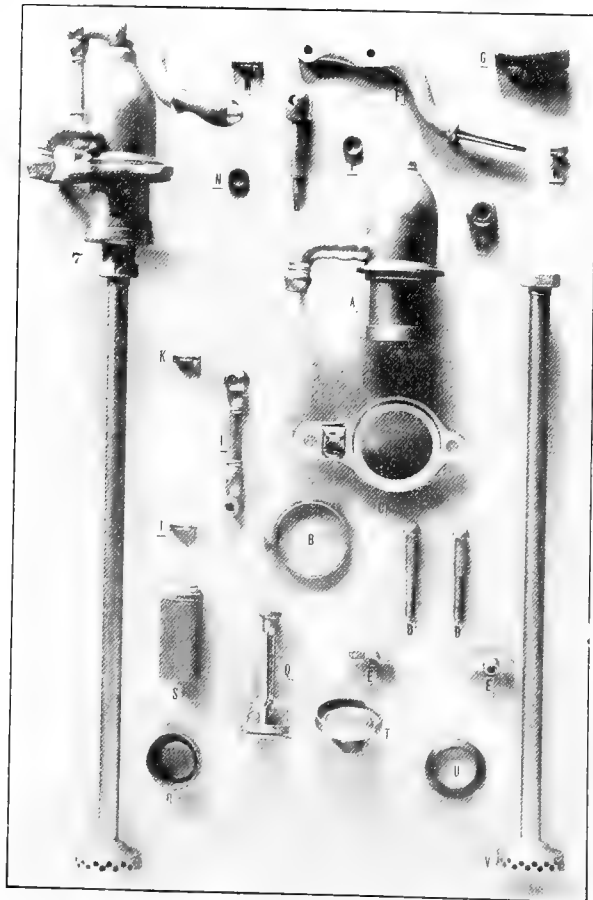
Washroom Pump and Fittings. Jas. L. Howard & Company.
